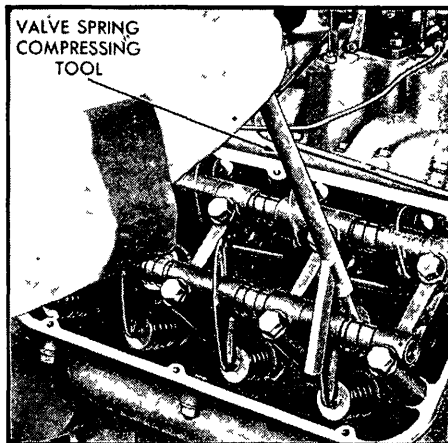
Chrysler and De Soto V8, 1951-52. Compressing valve spring to remove push rod
